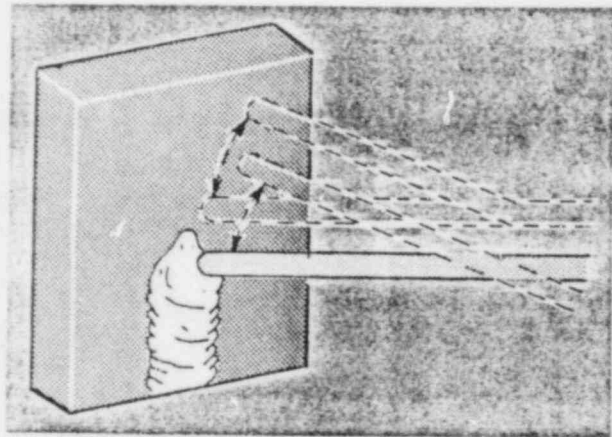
A whipping motion helps to control the puddle in uphill welding.
